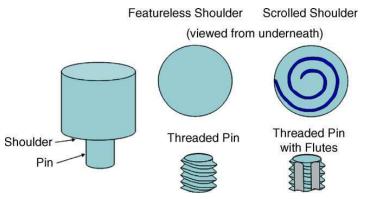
Line sketch of friction stir welding tool used for the butt joints of AA 6061-AZ 61 alloys for corrosion behaviour study [15]
